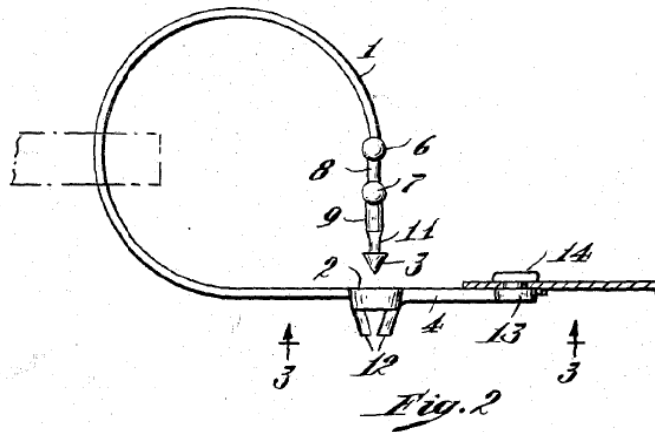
is a side view of the device disclosed in Merzer before the head 3 has been inserted in the socket 2. (Merzer, col. 1, ll. 42-43.)
